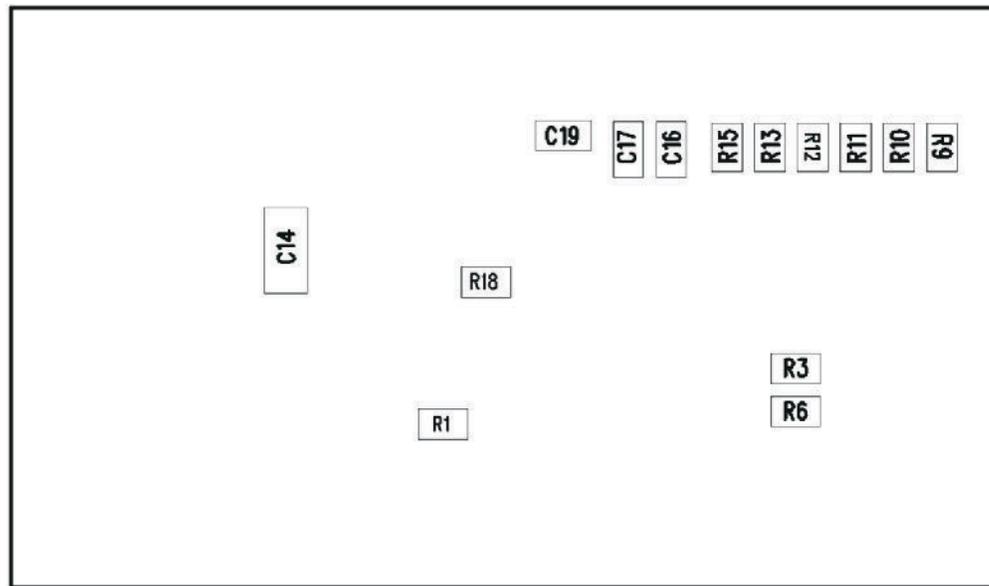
TPS53313EVM-078 Bottom Assembly Drawing (bottom view)
